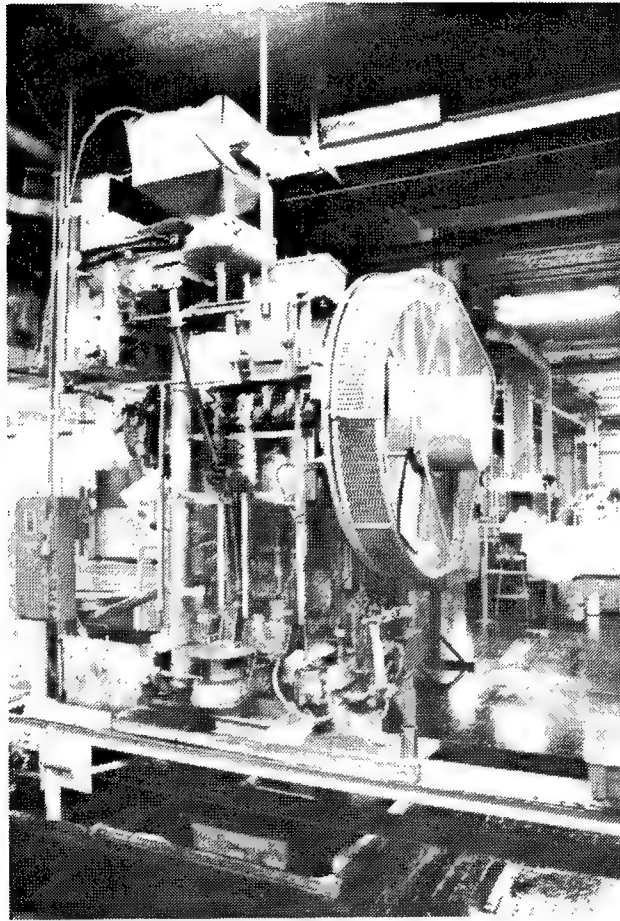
Building 3: Case Taper Machine manufactured by E. W. Bliss Co.
